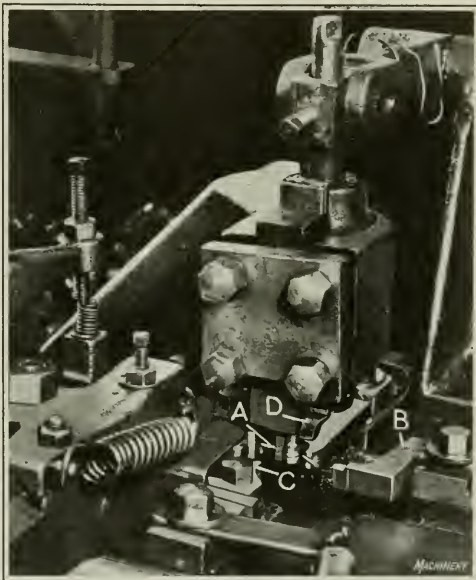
Top of Wire-forming Machine showing Arrangement of Dies/slides for making a Hook
